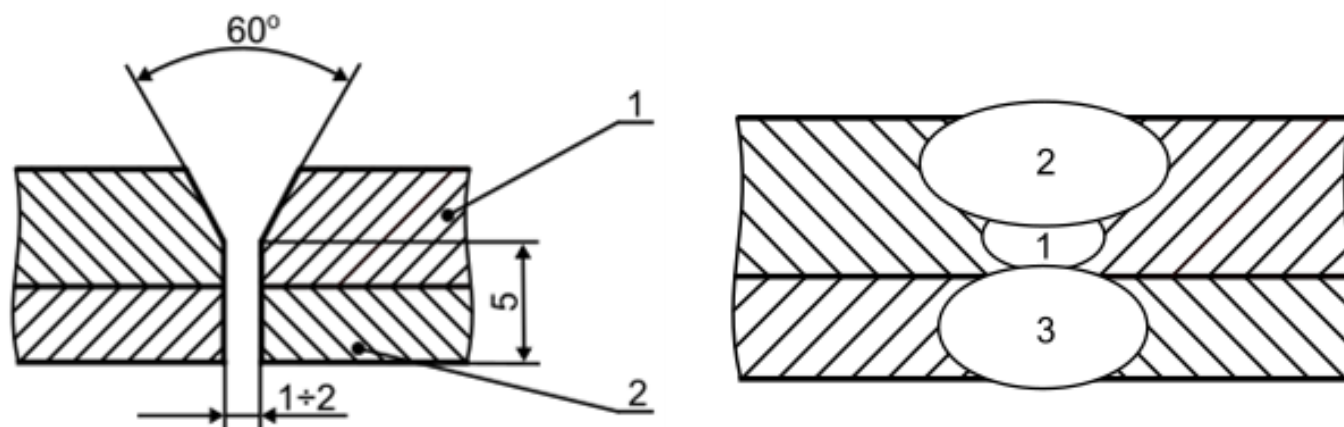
Schematic diagram of: a) pre-weld joint preparation (1 – substrate material, 2 – surfaced layer); b) welding sequence
